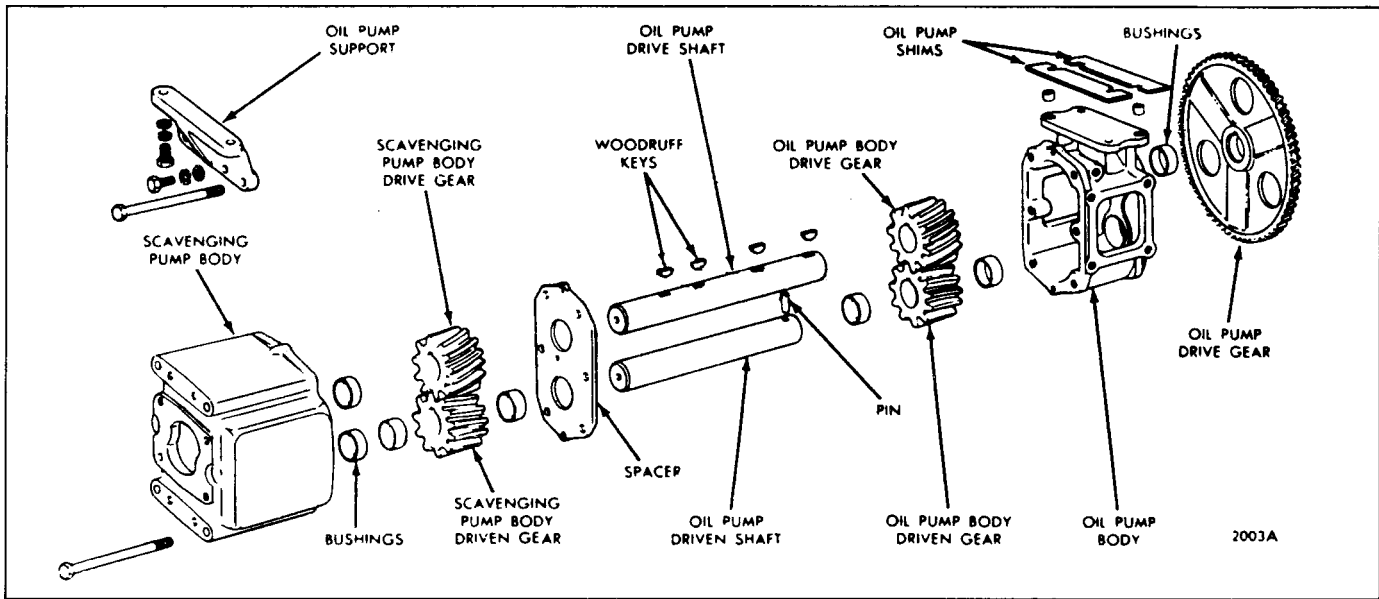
Oil Pump Details and Relative Location of Parts (12V and 16V Engines)
